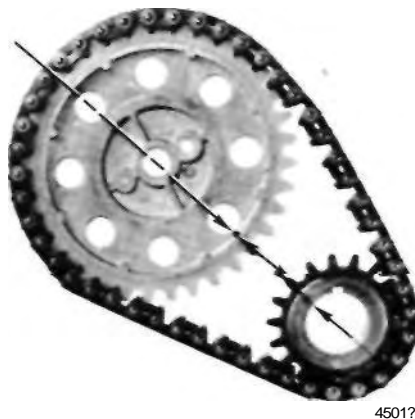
Place Marked Teeth on Center Line When Installing Sprockets and Chain
